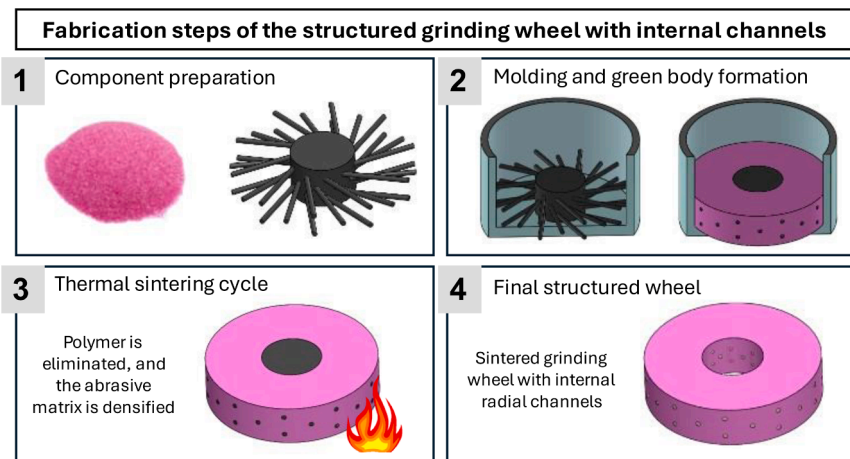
Fabrication steps of the structured grinding wheel with internal channels: (1) Component preparation; (2) Molding and green body formation; (3) Thermal sintering cycle; (4) Final structured wheel with integrated radial channels.
